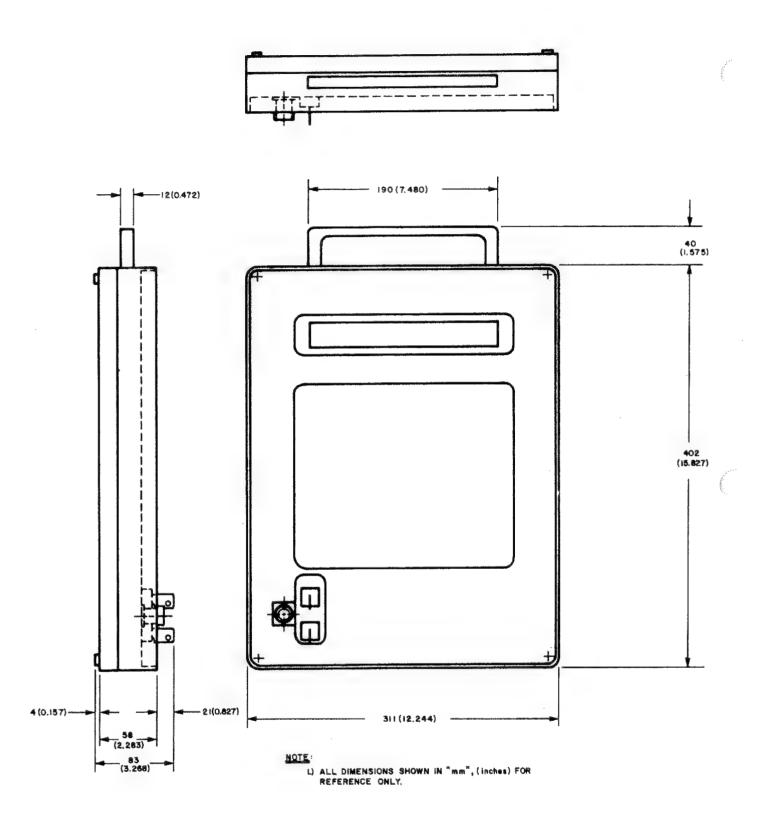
TAM-2 (Portable TAM) Outline Drawing
